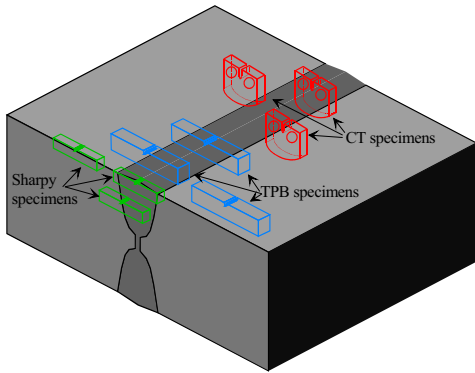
View of the welded test coupon with specimens sampling
